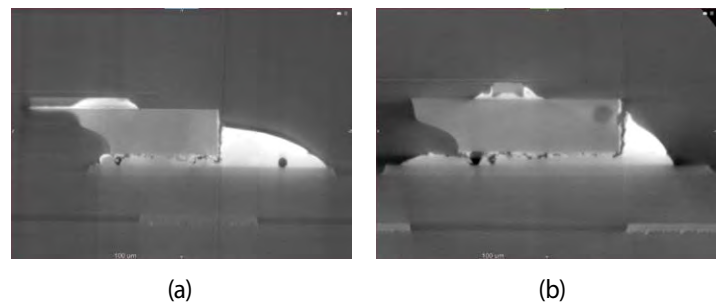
3D X-ray cross-section with a focus on the gate corner solder joint, revealing the underlying wear-out mechanism.
